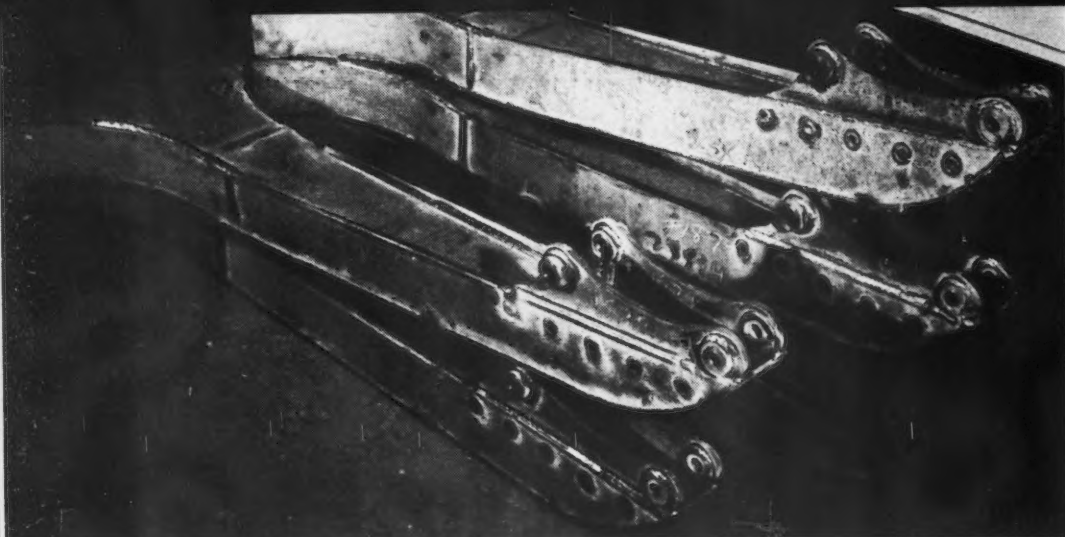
Finished uprights showing plug welds used wherever additional rigidity is required.
